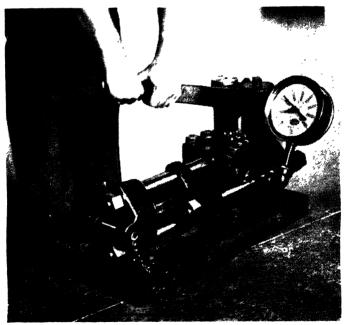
A shop type tensile test bend test machine (Courtesy of: Air Reduction Sales Company)
